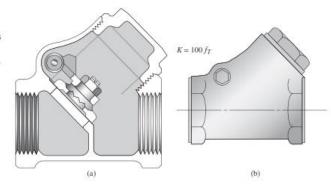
Check valve ball type. (Reprinted with permission from "Flow of Fluids Through Valves, Fittings and Pipe, Technical Paper 410" 2009. Crane Co. All Rights Reserved)
